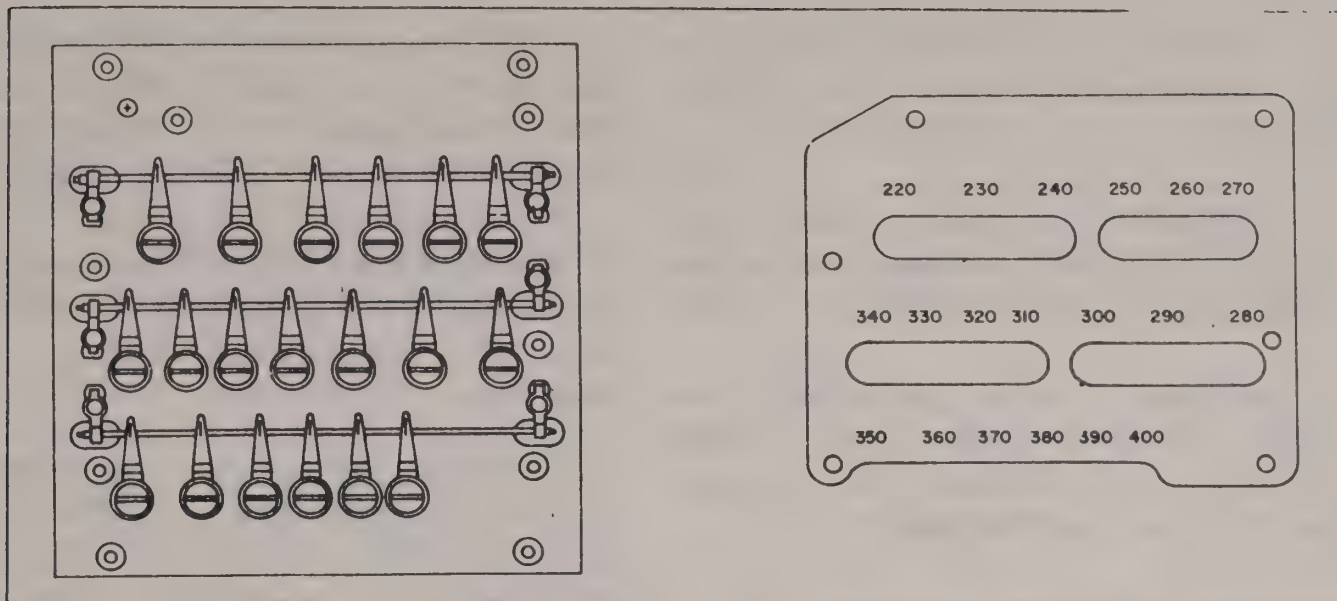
Radio Transmitter T-217A/GR, R-1205 Wiper Assembly With Cover Plate Removed.
